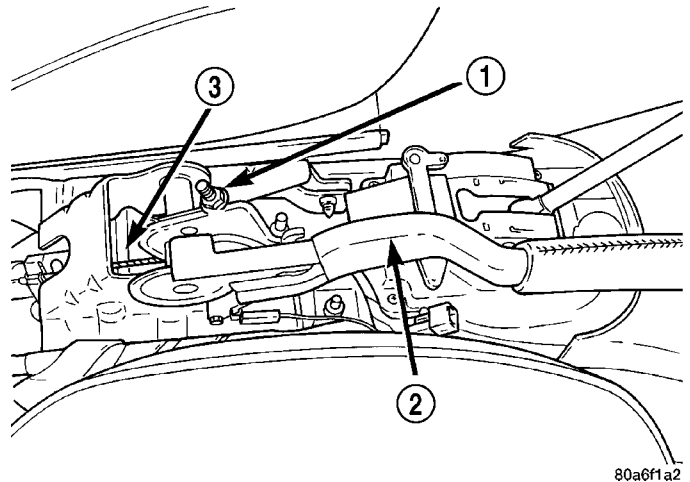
Park Brake Lever Output Cable Adjustment Nut
